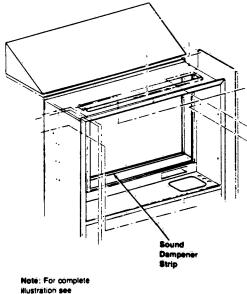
INSTALLATION OF SOUND DAMPENER
